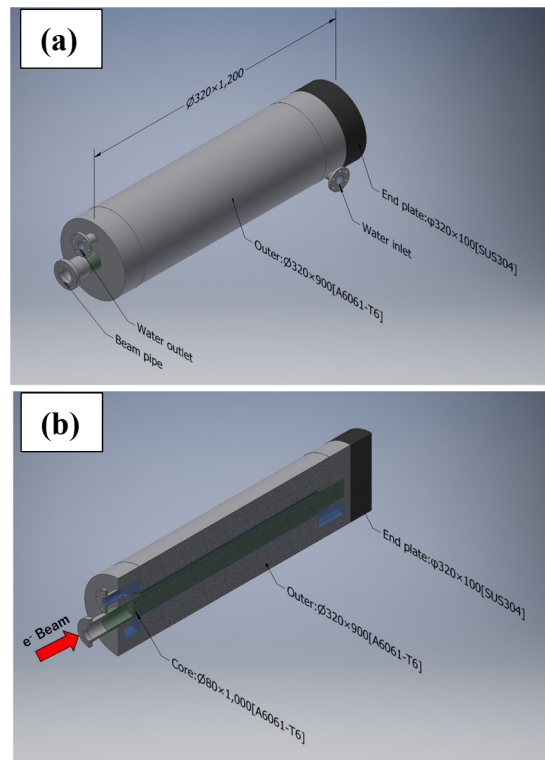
Design of beam dump2. (a) Outline drawing. (b) Cross section.
